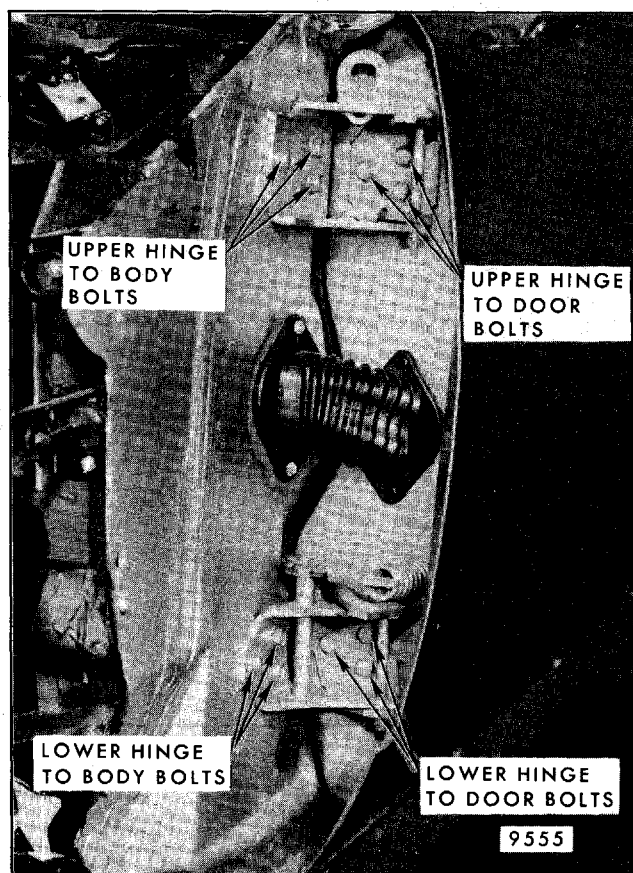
Typical Front Door Bolt-On Hinge Attachment - All Except "H and X" Styles
